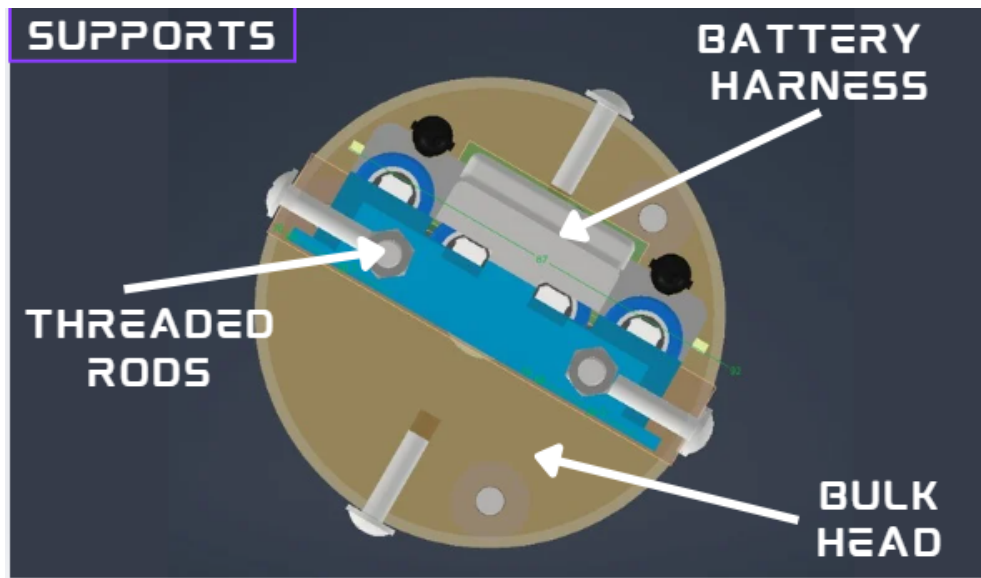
Labelled cross-sectional avionics bay showing component stacking and clearances
